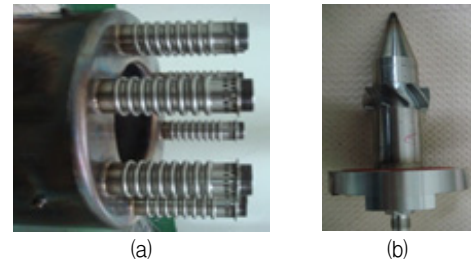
Component part of combustor: (a) Liner with swirl guide, (b) Burner nozzle
